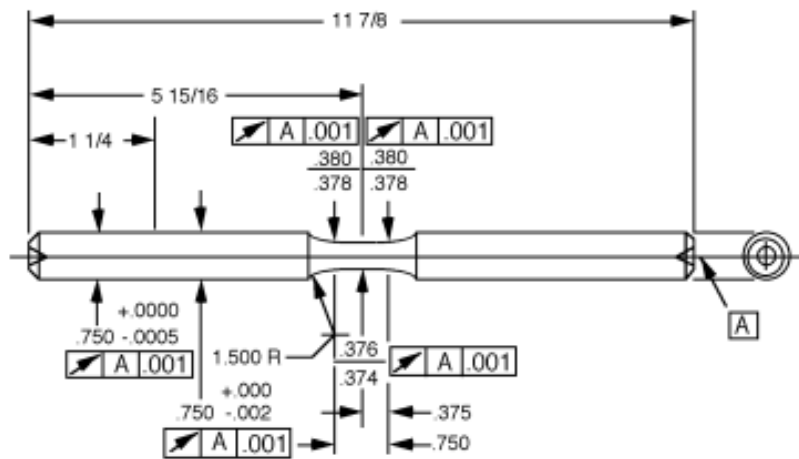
Configuration of fatigue test specimen (all dimensions in inches)
